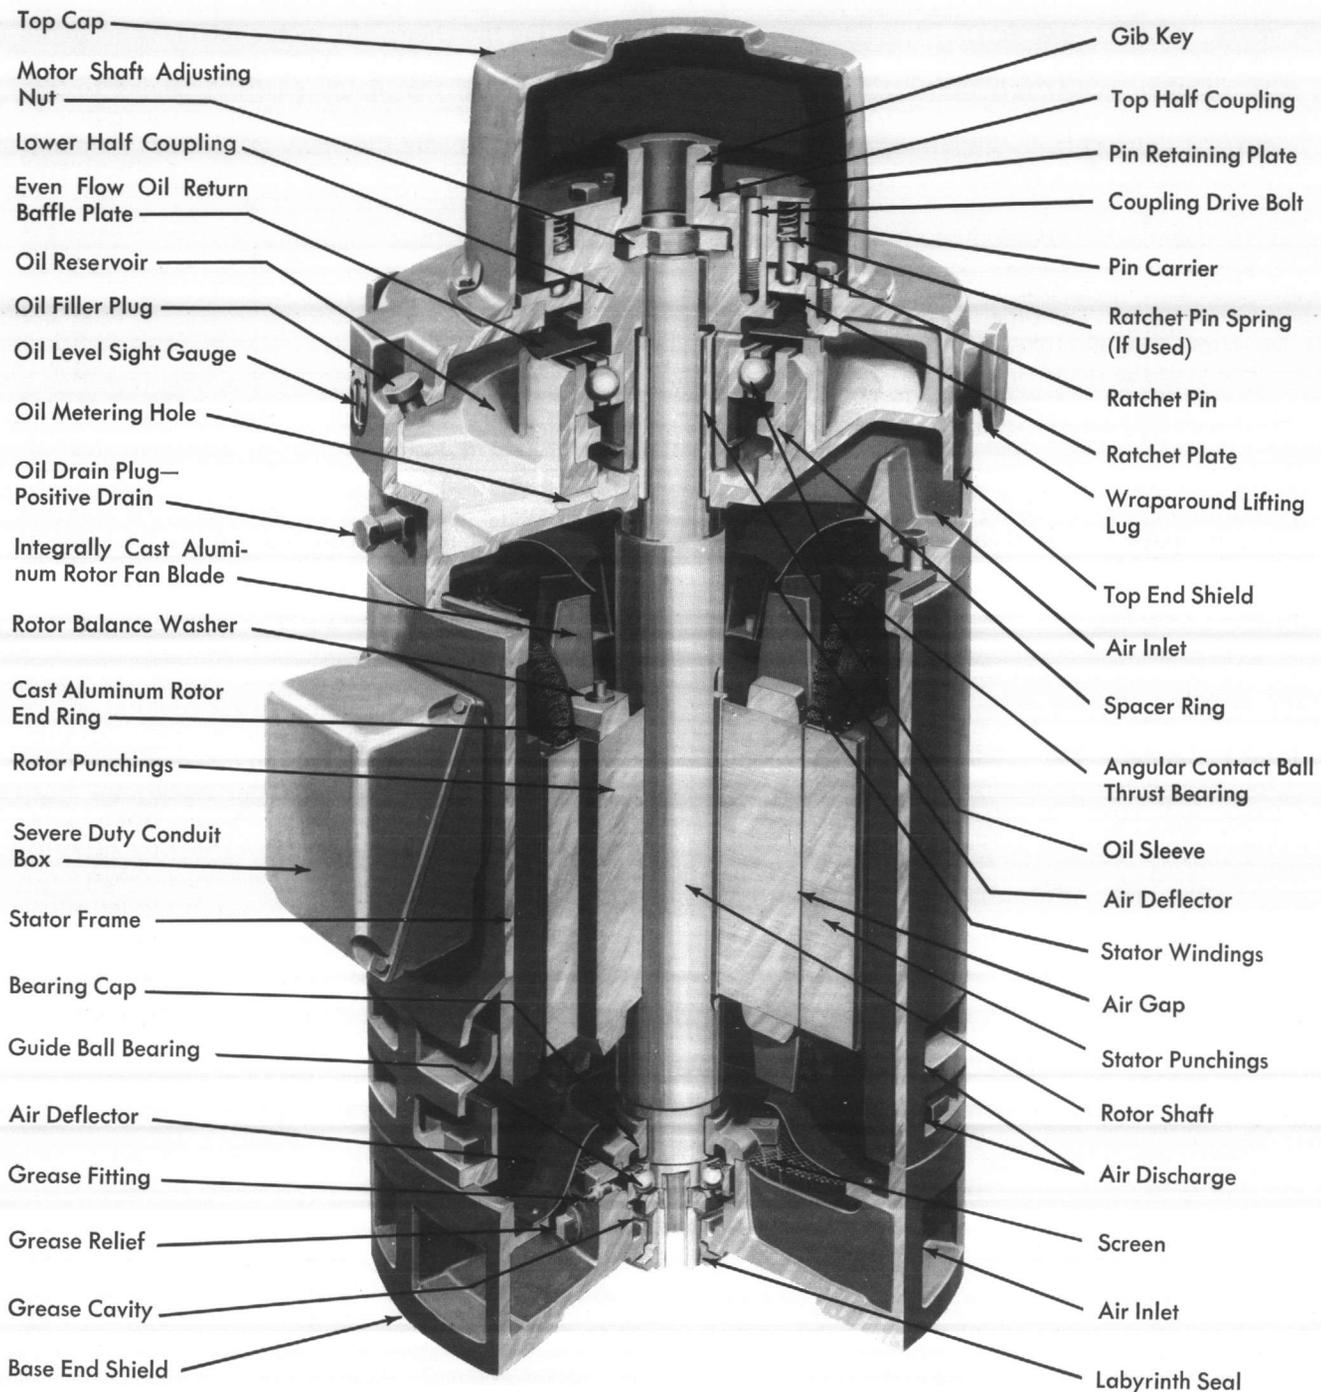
Typical high-thrust, hollow-shaft motor with non-reverse coupling. (Motors for 3000- and 3600-rpm operation in frames B444 –B445 have oil-lubricated lower bearings; see Fig. 4.)
